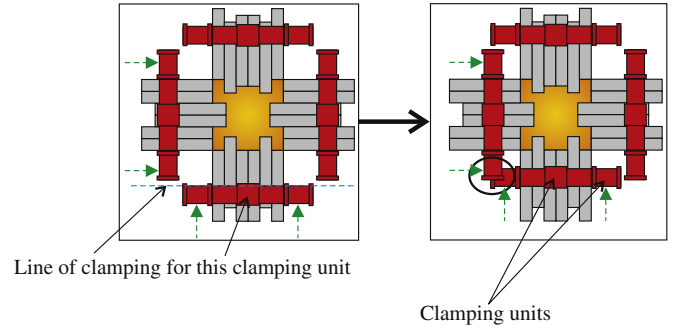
2D view of the space constraint affecting the position of clamping.
